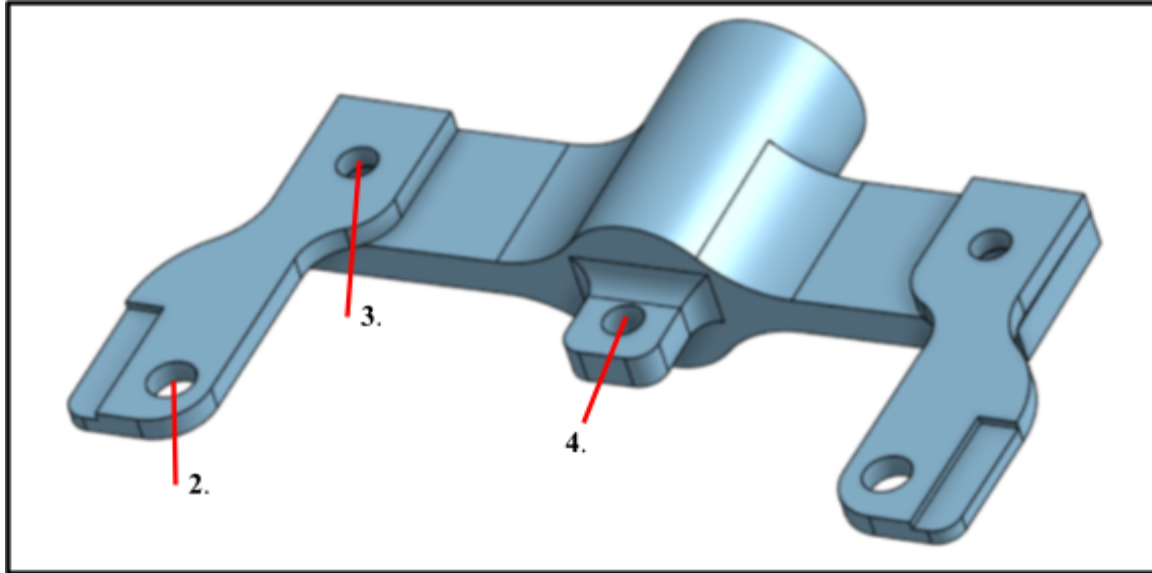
Assembly of the scraping blade holders and the part that is connected to the DC motor.
